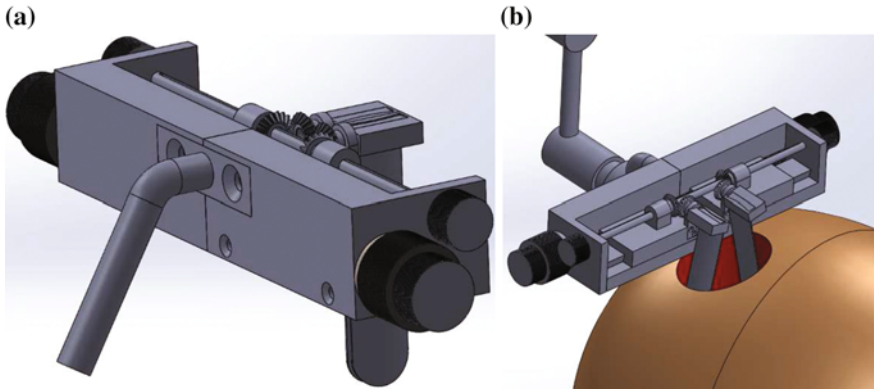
Schematics of the mechanism for adjustable angle of retraction spatulas. a Spatulas and its holder assembled on sliders, b full assembly of the mechanism for adjustable angle of retraction spatulas
